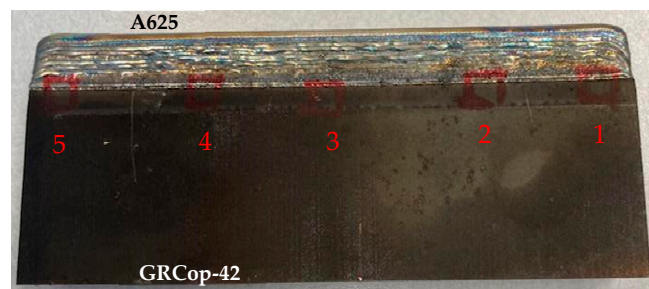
As-received sample—A625 on GRCo-42—with perpendicular cut locations marked.
